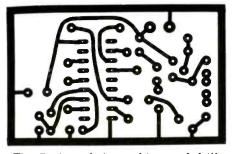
Actual-size etching-and-drilling guide for transmitter pc board.
